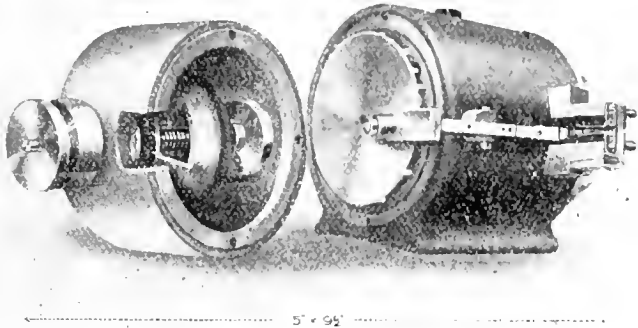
DYNAMO, AND CASING ENCLOSING FRICTION DRIVE.
